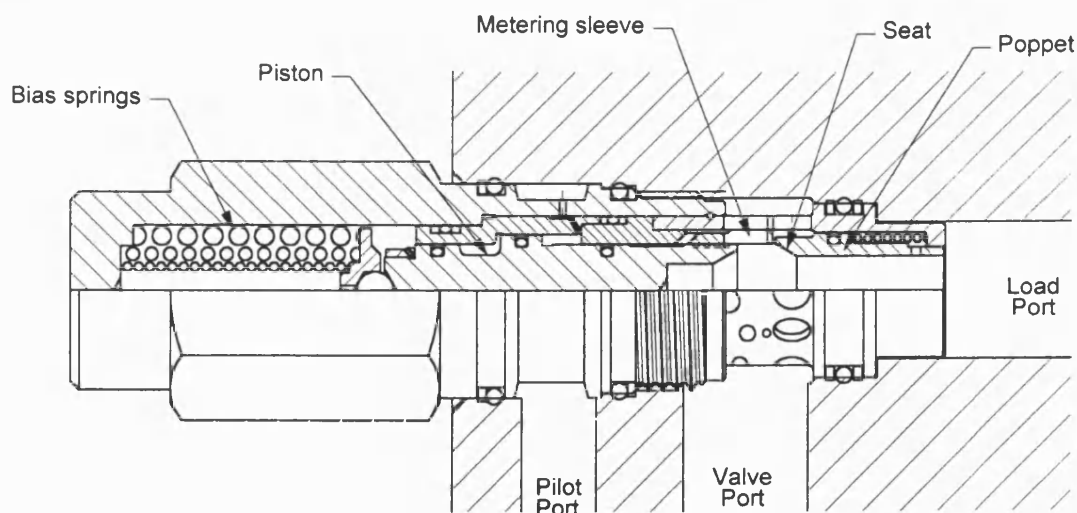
Hole pattern of load control valve in a 2-D layout
